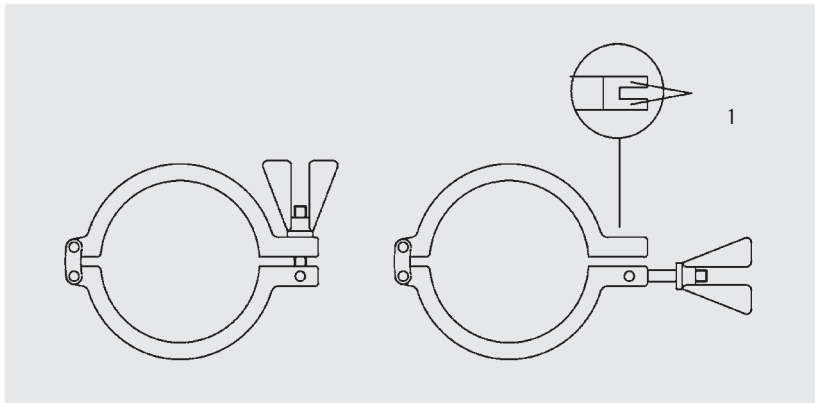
| Clips on the Clamps, Flanges and Threaded Couplings
